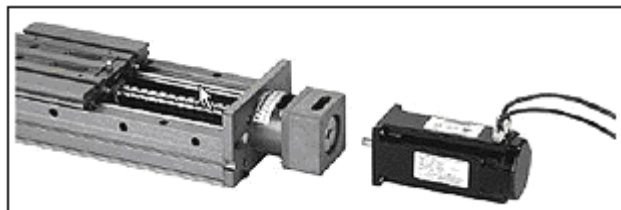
Motor mounting on the Sliding Mechanism – source: DANAHER motion producer
